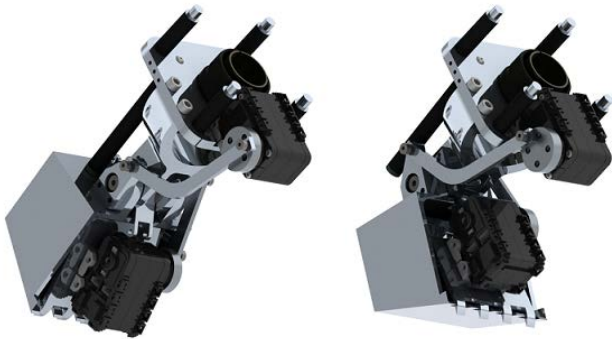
(left) Bucket with closed thumb (right) Bucket closed with sample acquired, ready to return sample.
